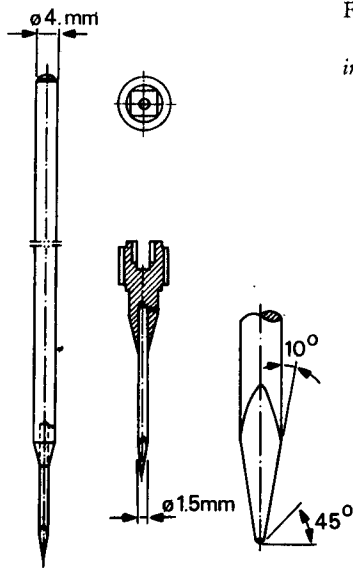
Left.—Outer pin. Centre.—Middle pin. Right.—Enlargement of the pin tip showing conical shape of end.
